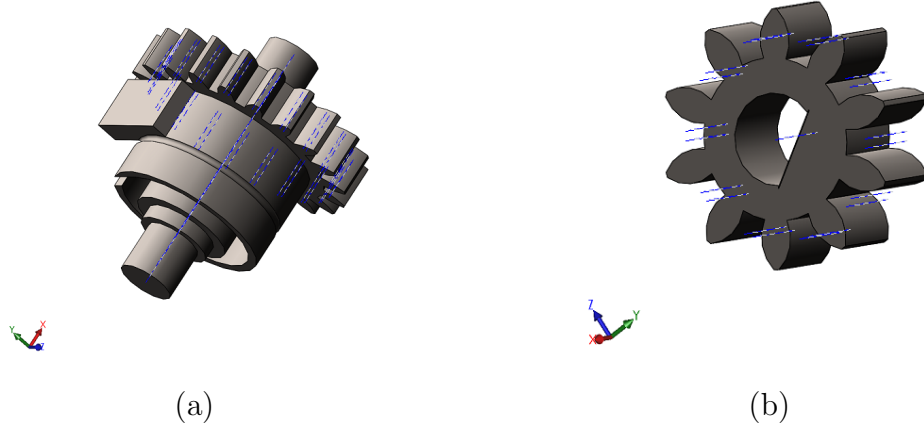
Gear train: (a) driving gear (b) driven gear
